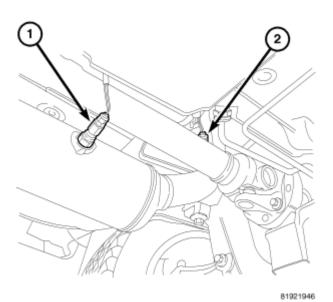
Left Side O2 Sensors Courtesy of CHRYSLER LLC
